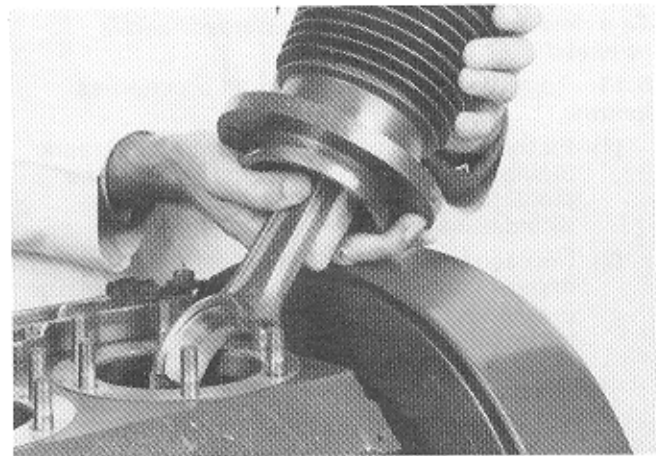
Cylinder, Piston and Connecting Rod Removal.
